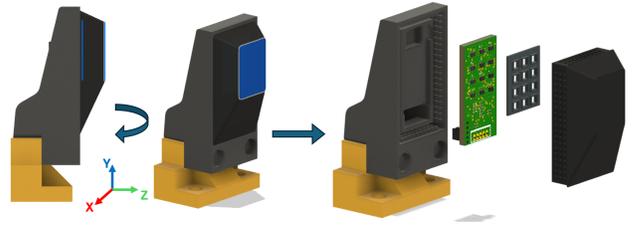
CAD of an assembled sensor (left) and exploded view with all components (right)
